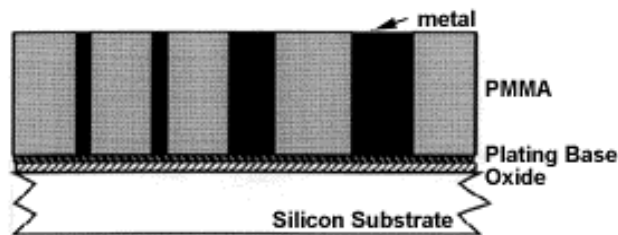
The metal and PMMA are milled back to produce a uniform top surface.
